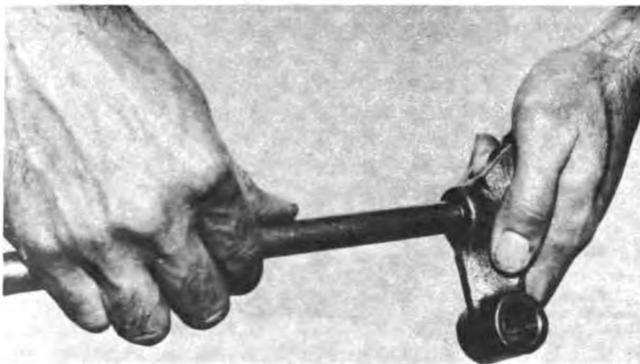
(N10413). Using A Push Rod To Check The Insert.
